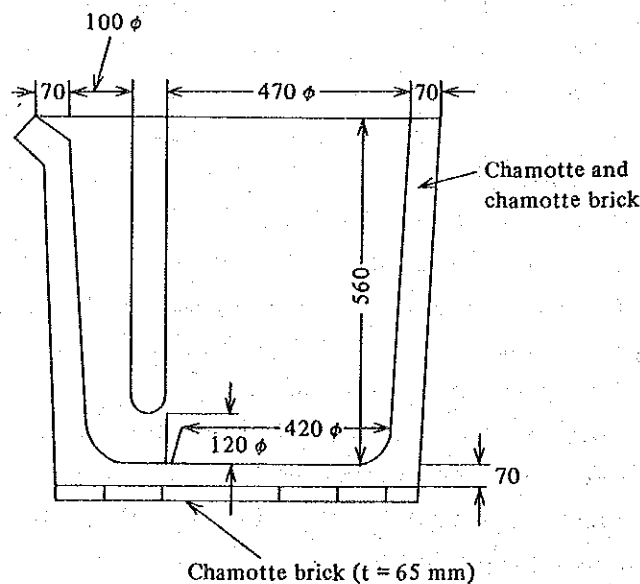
Tea-Pot Ladle for Steel Casting
